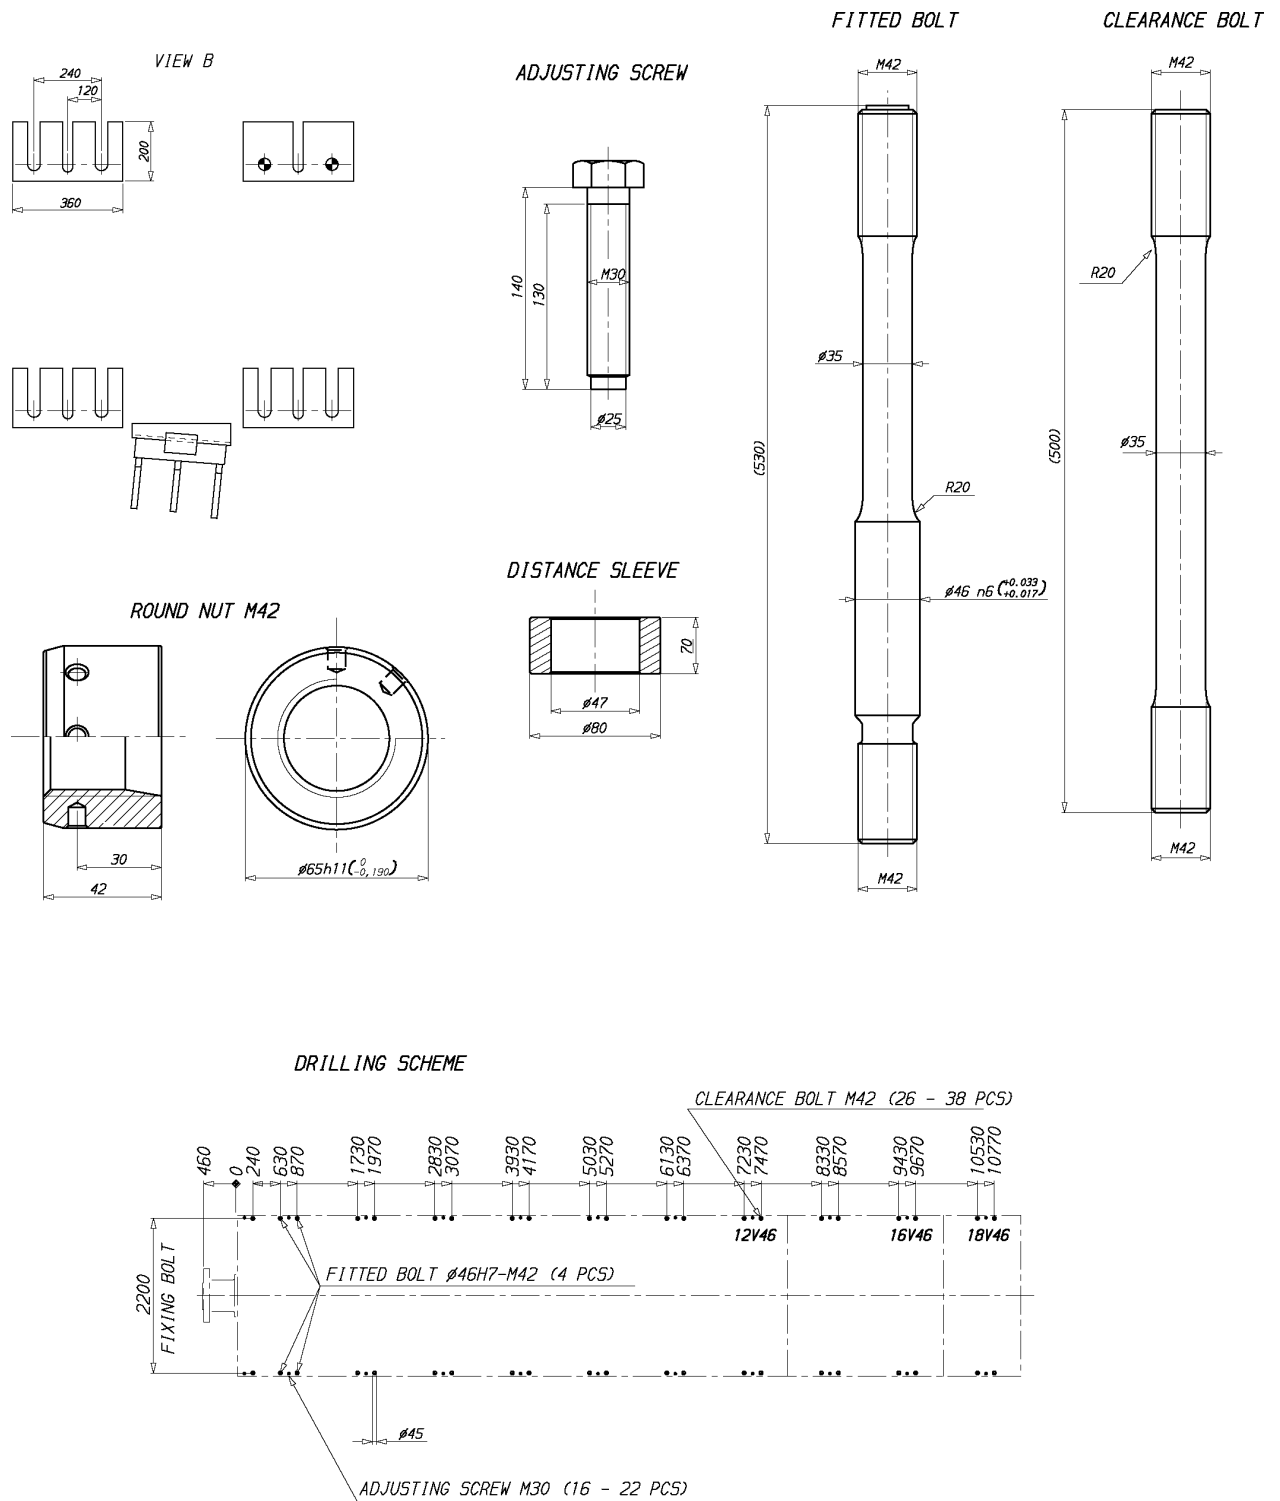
Seating and fastening, rigidly mounted in-line engine on resin chocks (1V69L0082c)
